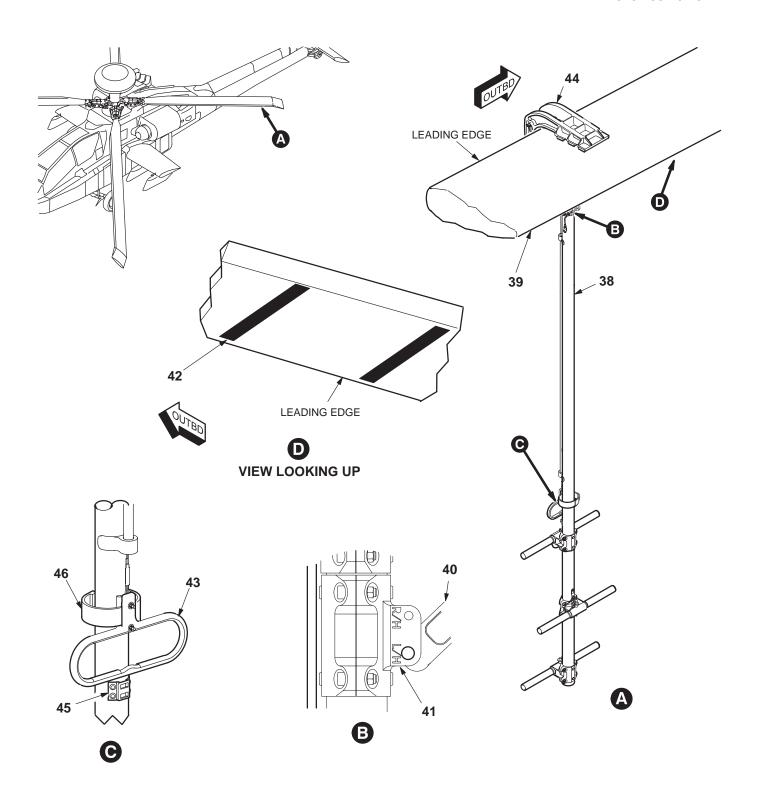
Installation of Blade Handling Pole on Inboard Stripe L/H Aft Main Rotor Blade
